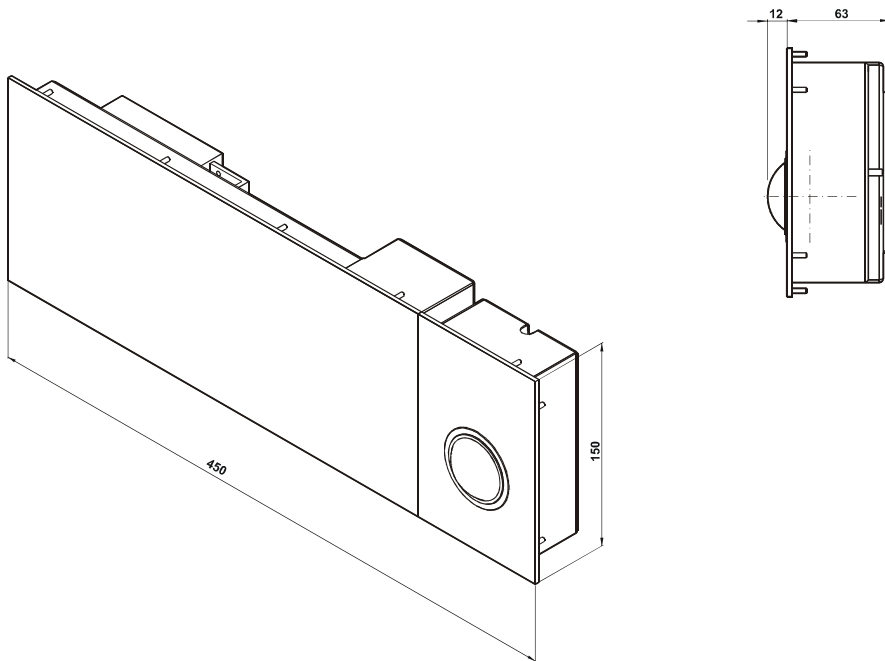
Transas ES4 dedicated keyboard. Dimensional drawing of combined Keyboard and Trackball
